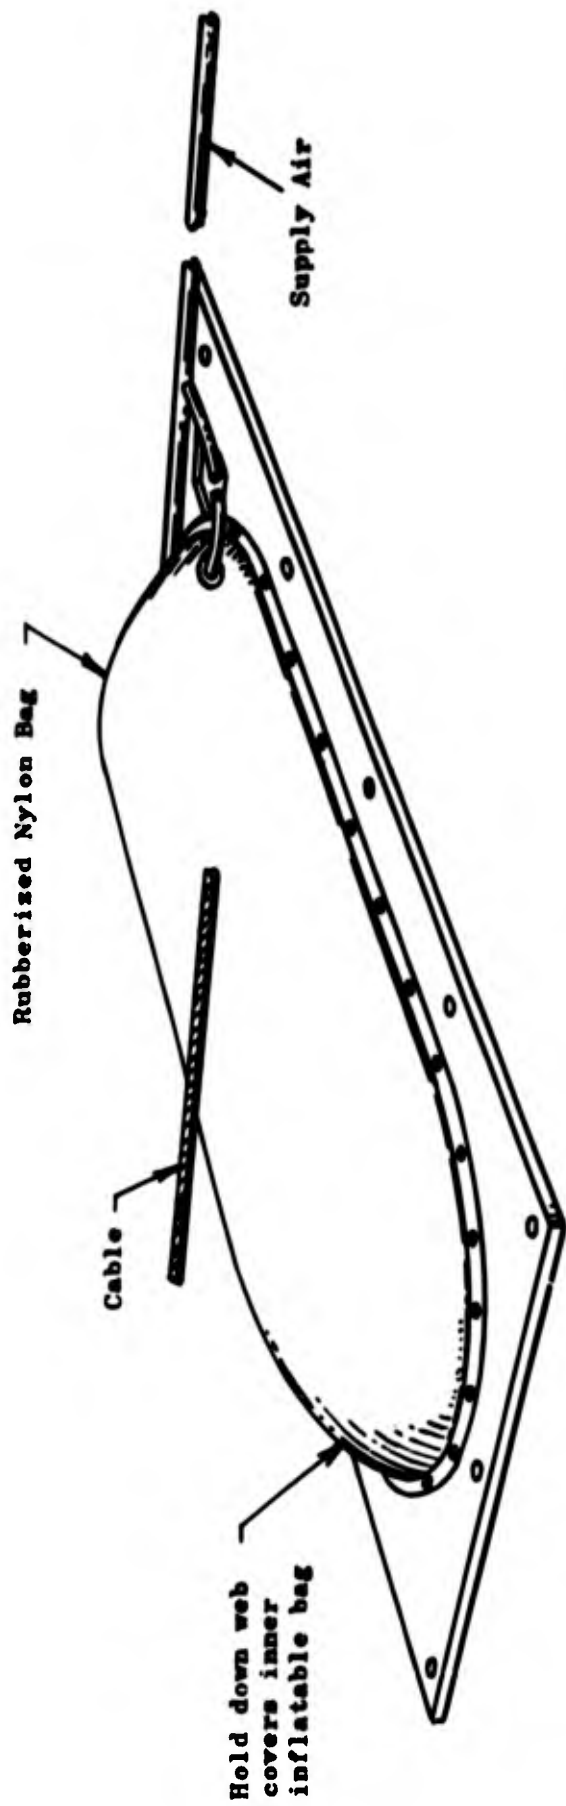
INFLATABLE CABLE SUPPORT - DESIGN II
